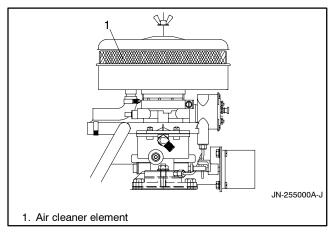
Air Cleaner Assembly, 10/12 kW Shown
